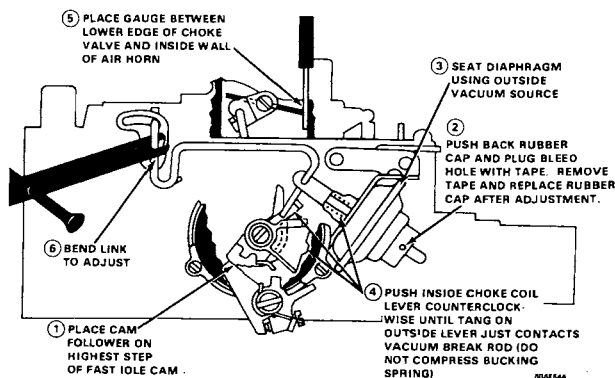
E-54A - Vacuum Break Adjustment Lean Setting
